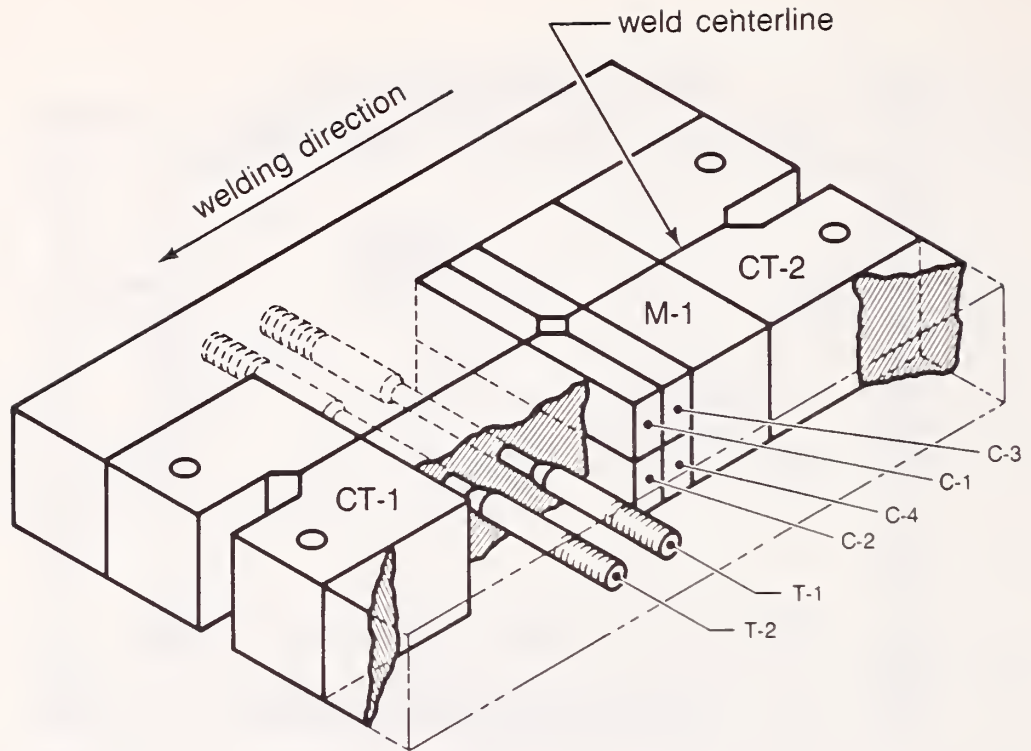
Orientation of mechanical test specimens removed from weld.
